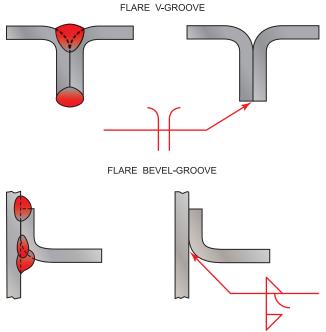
Designating flare V-groove and flare bevel groove welds.
